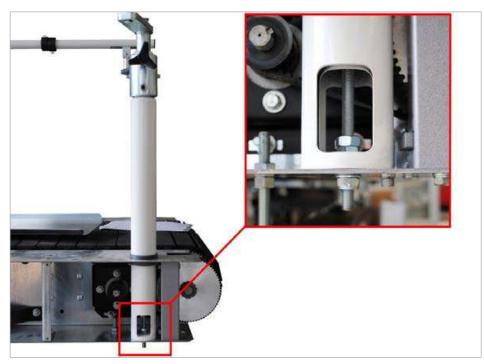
Fixing screws in railing mount, PPS Bari-Mill
